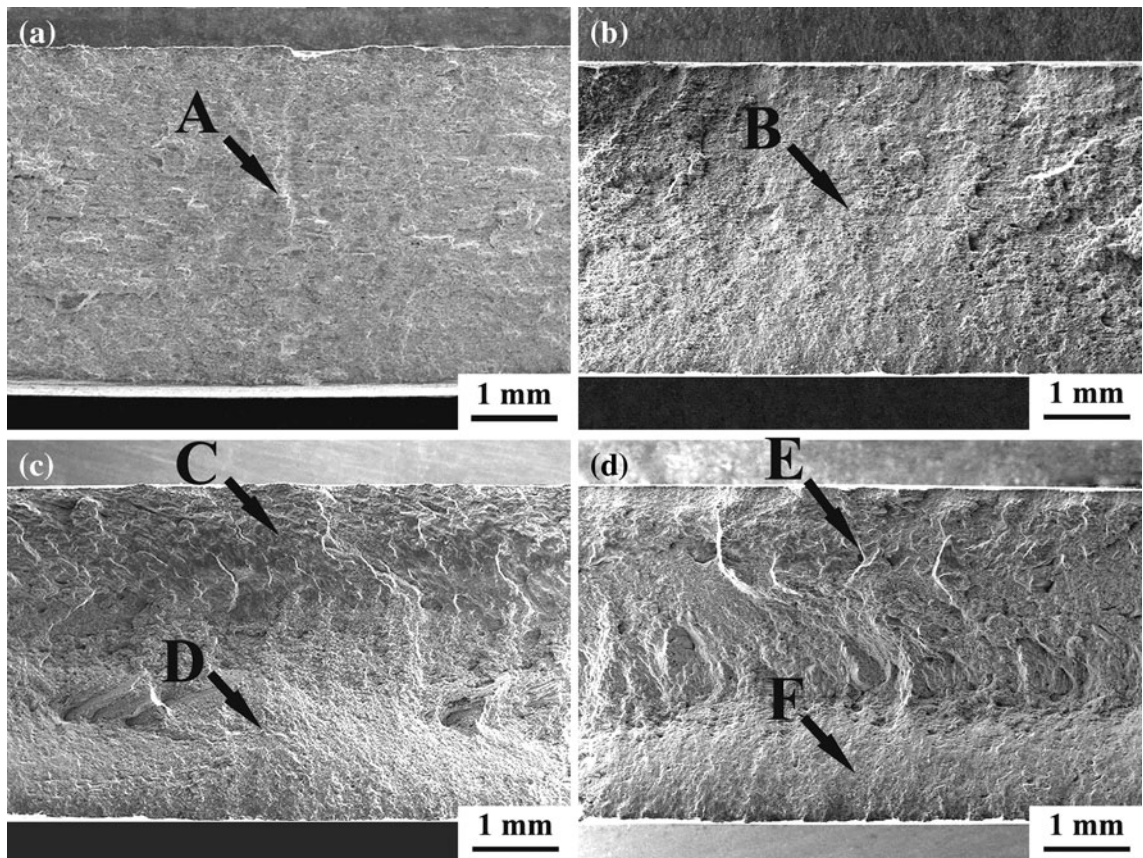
Macrographic fractographs of (a) fracture I, (b) fracture V, (c) fracture III, and (d) fracture IV.
